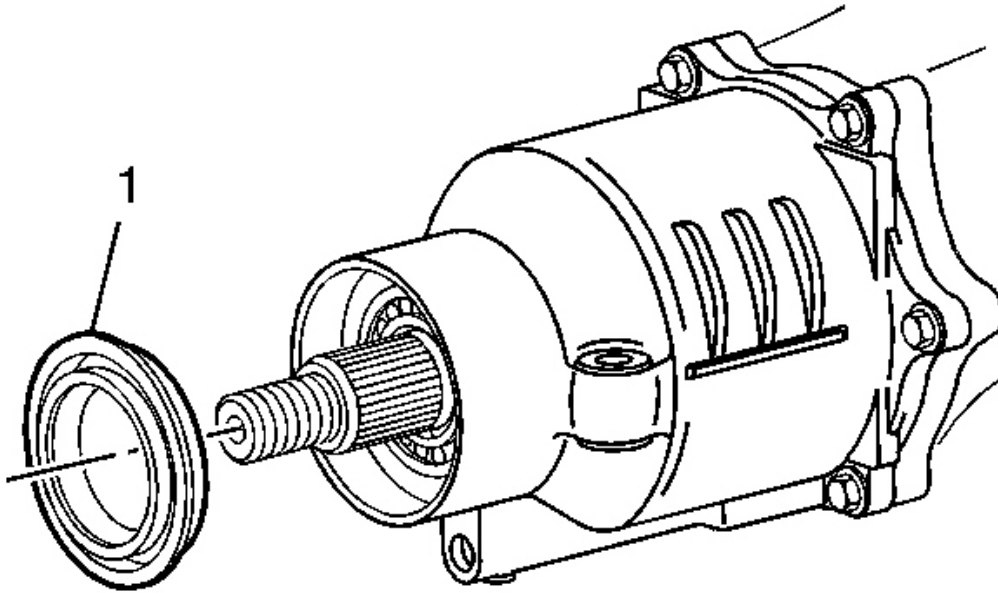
Removing Input Flange Oil Seal From The Housing Cover
